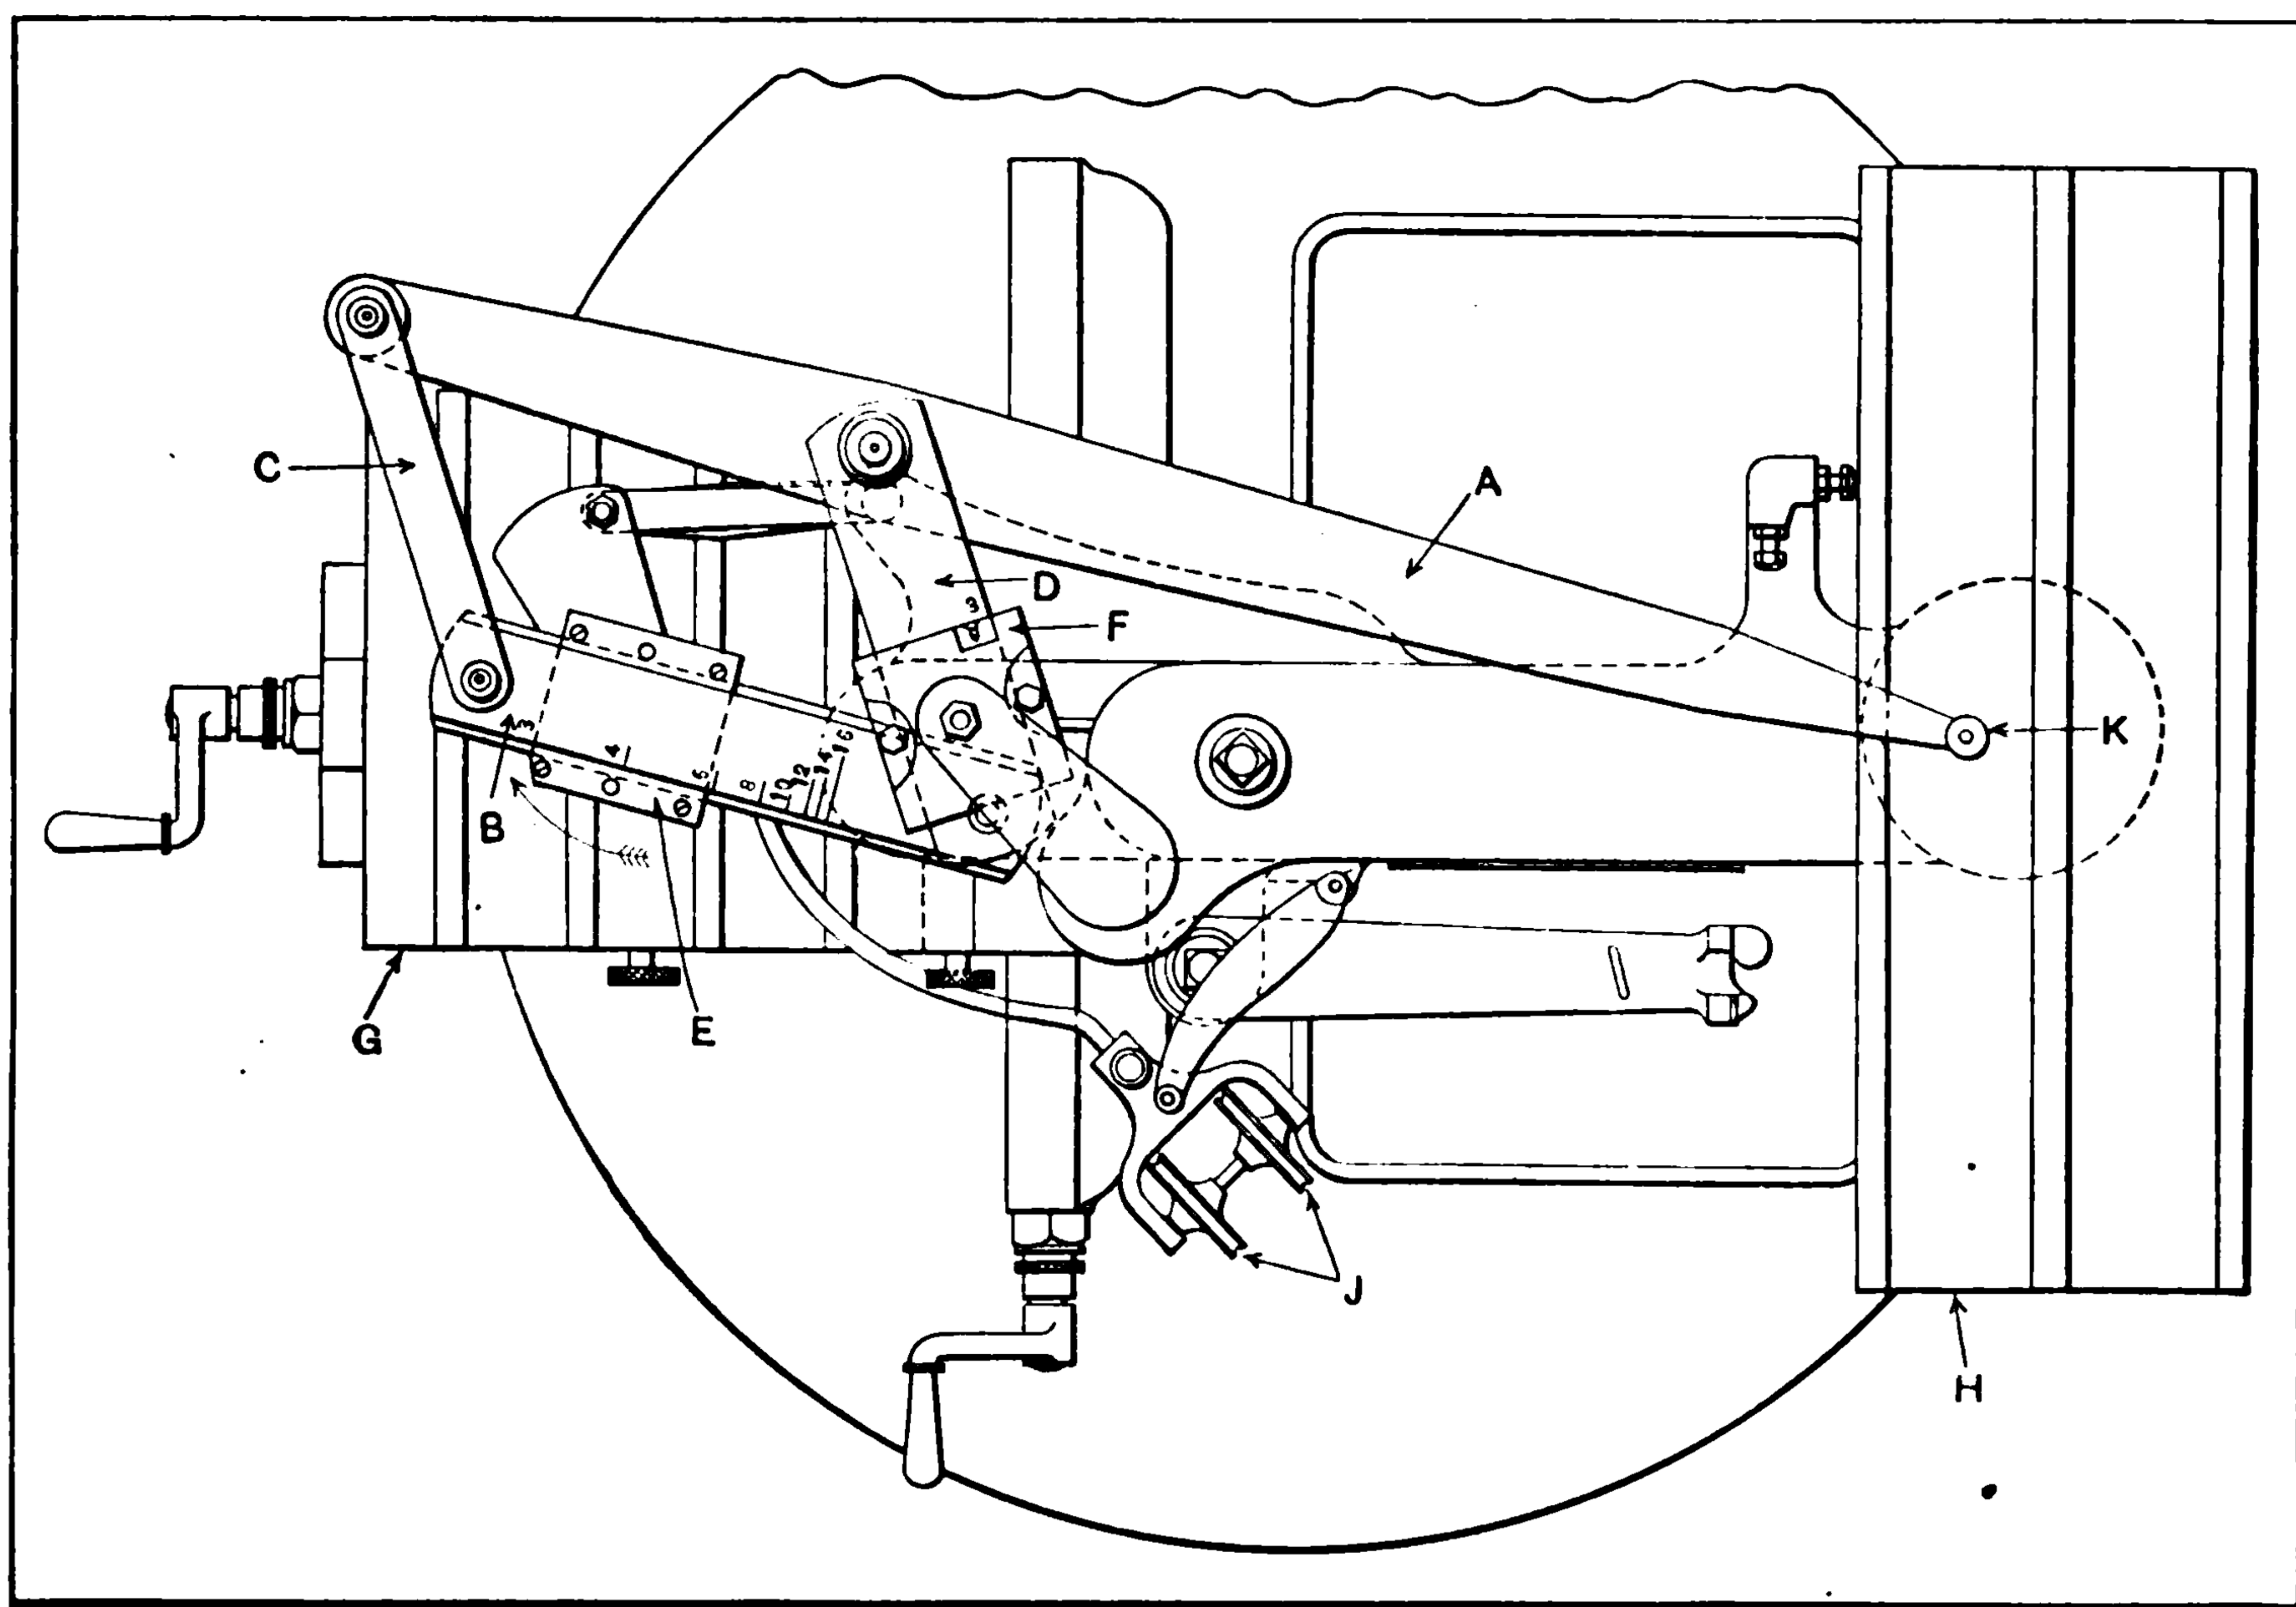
Pantograph Mechanism on Gorton Engraving Machine
